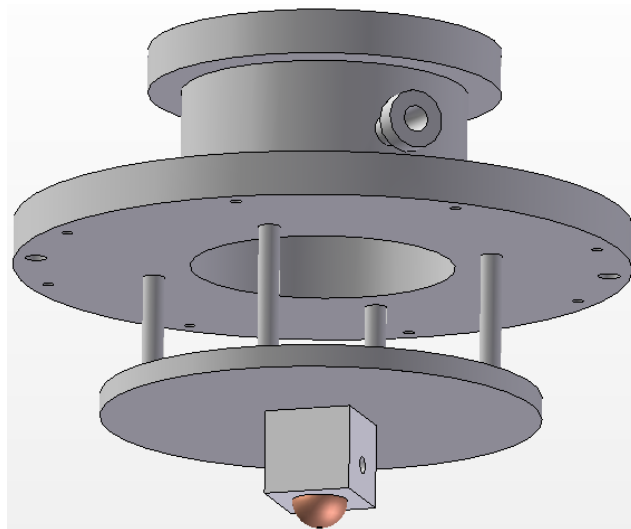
Top Electrode Assembly attached to the chamber lid. The Turbo Pump sits on the top of this flange.
